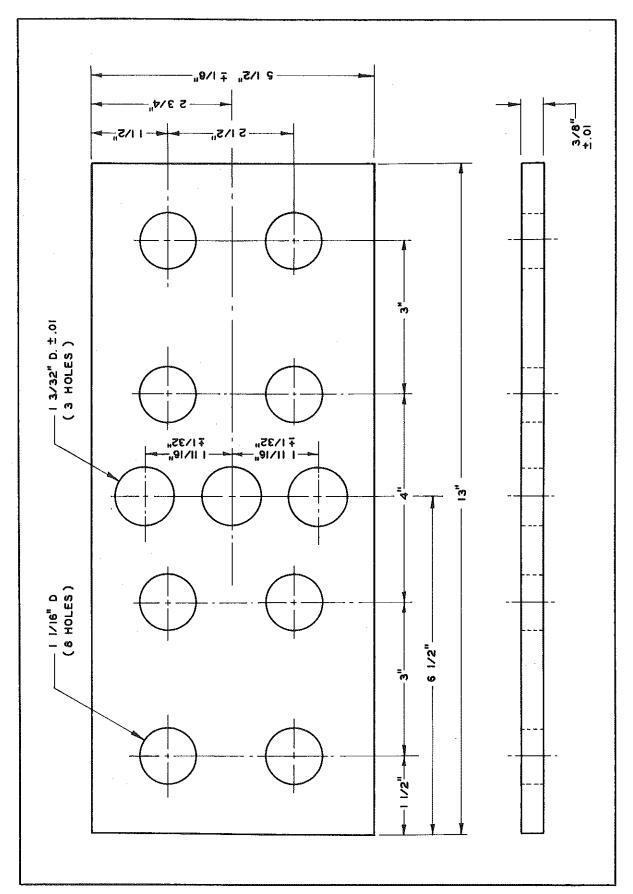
Proposed rigid fuse plate for use with 10WF 21 sign post.
